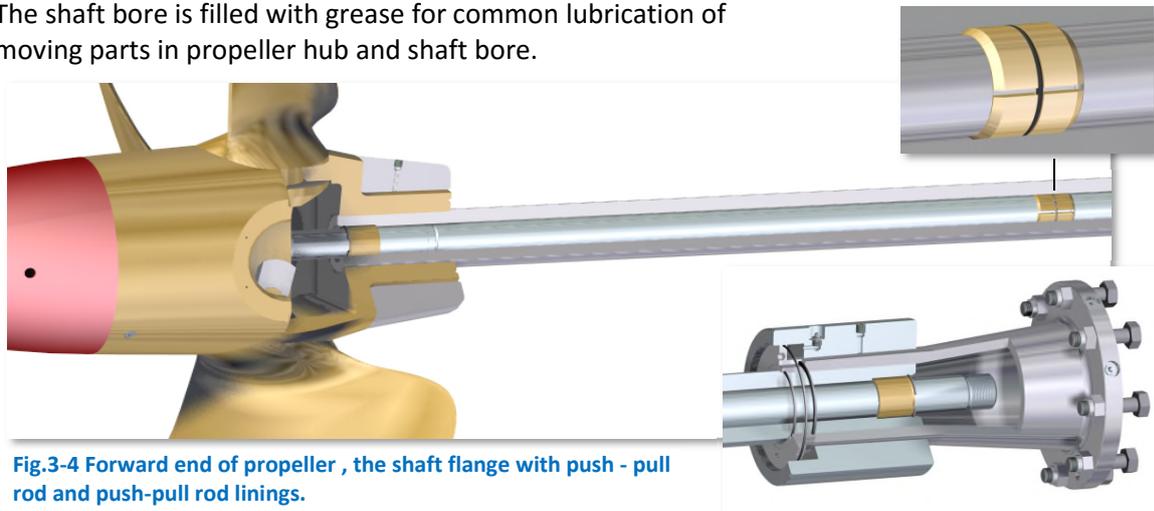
Forward end of propeller , the shaft flange with push - pull rod and push-pull rod linings.
